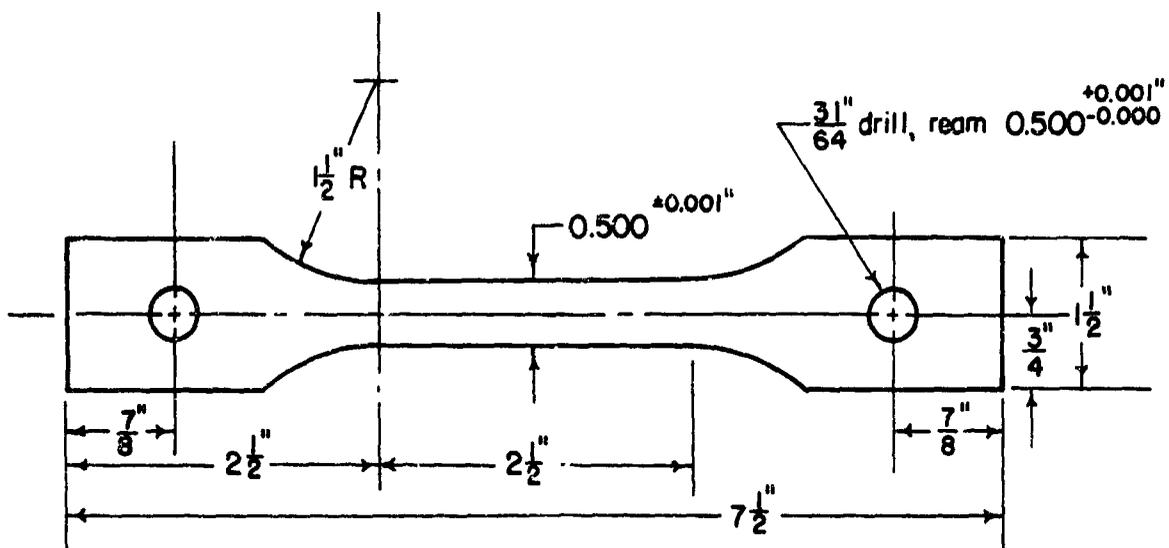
SHEET AND THIN-PLATE TENSILE SPECIMEN
